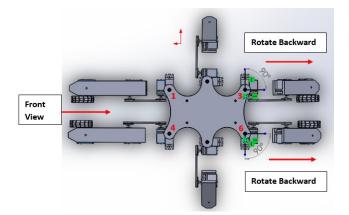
Step 4 – roller wheel rotate backward and front roller will roll upward.
